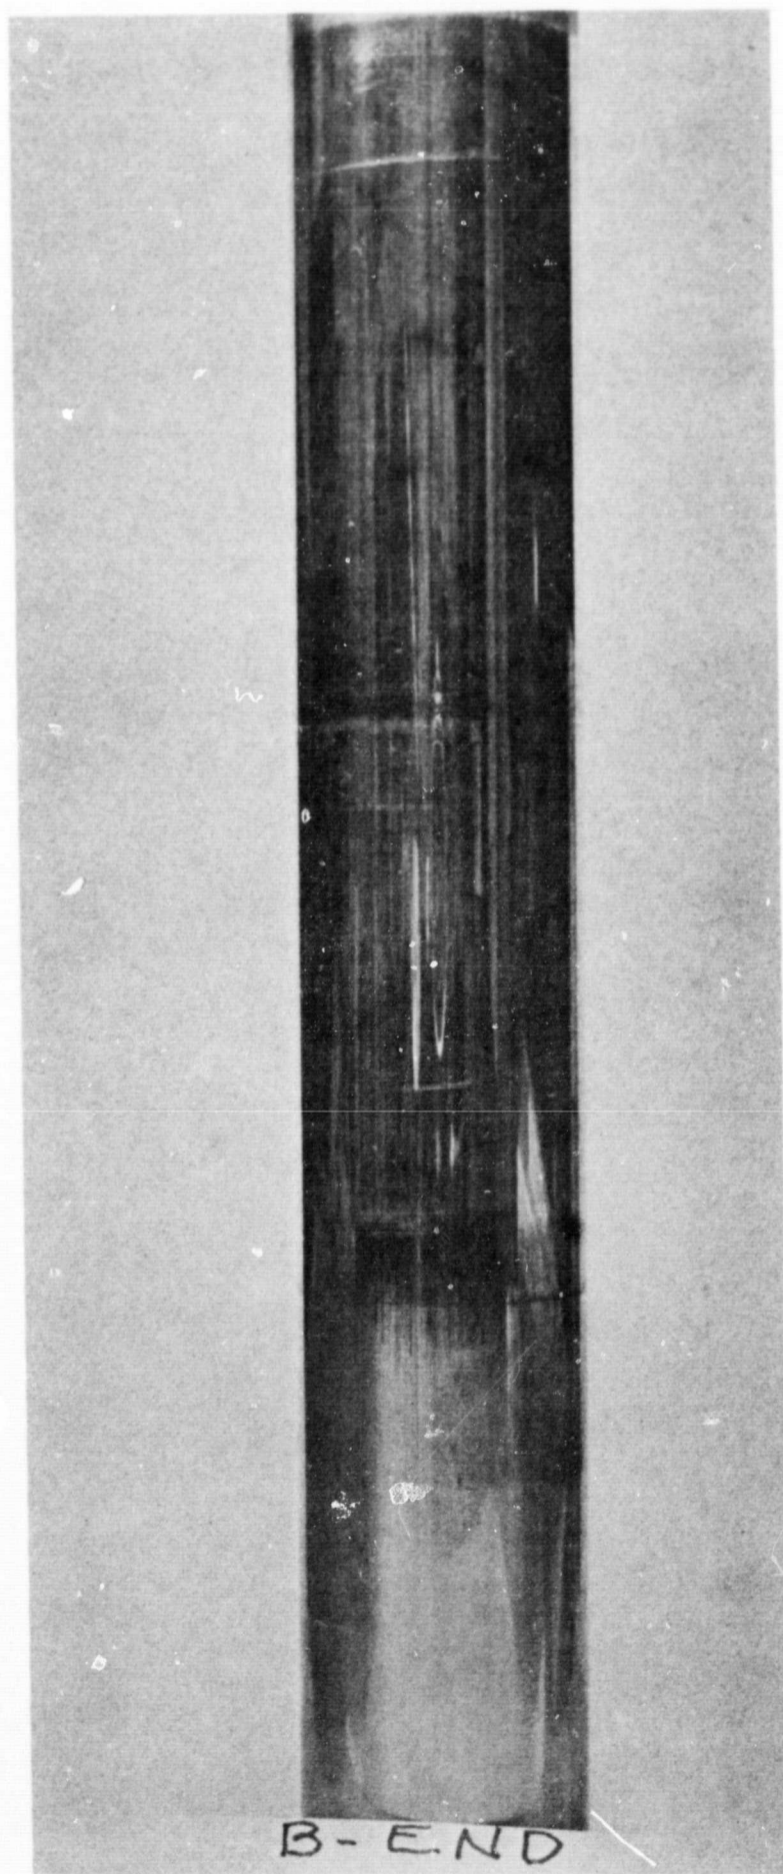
Piston Rod, B-End, One-Inch Cobalt Molybdenum Lip Seal
